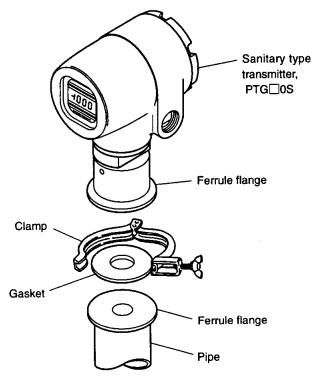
Example of Mounting Sanitary type Transmitter
